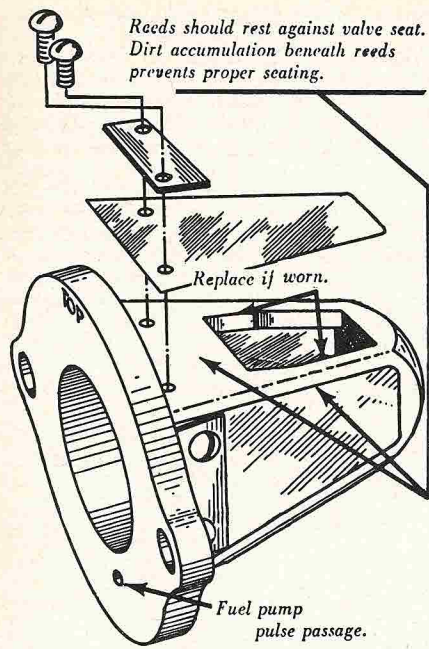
Pyramid type reed valves are used on all models except C-5, C-7, C-51 and C-71. Refer to Fig. HL55A on Models C-9 and C-91.
